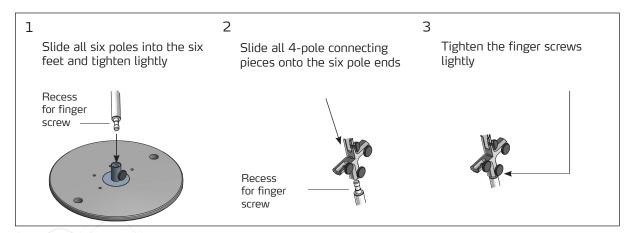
Mounting the lower poles and the 4-pole connecting pieces.
